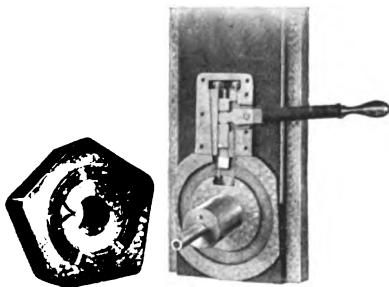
TURRET REMOVED SHOWING LOCK BOLT ADJUSTMENT
